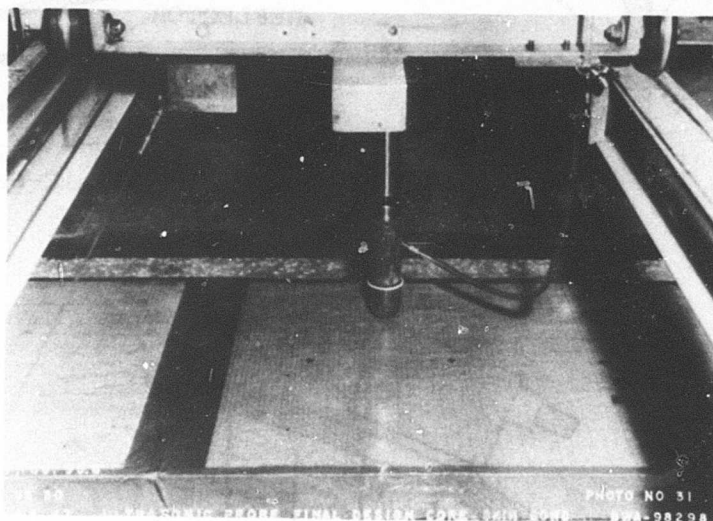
Ultrasonic Inspection of Blade Core-Skin Assembly.
